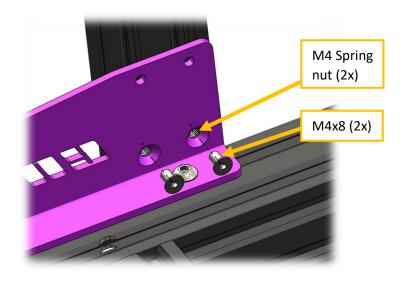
2020 Extrusions L=650mm mounting to bottom frame
